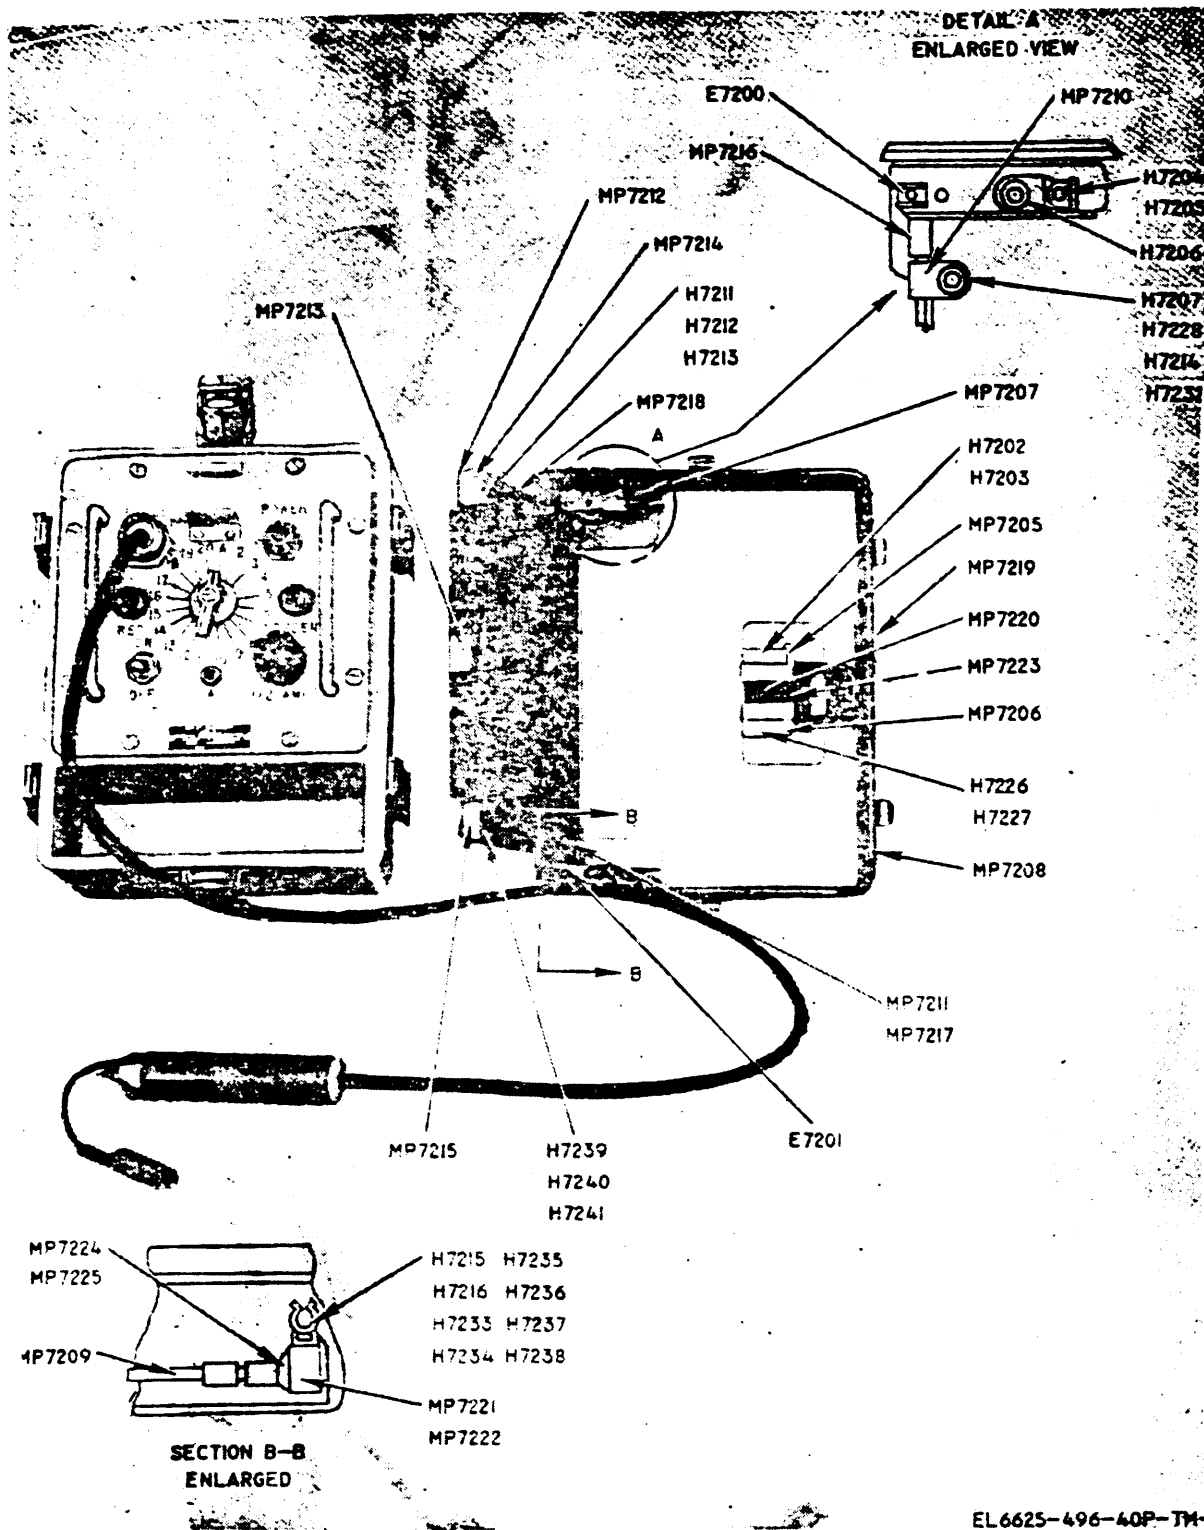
Test Set, Radio AN/VRM-1, cover components.
